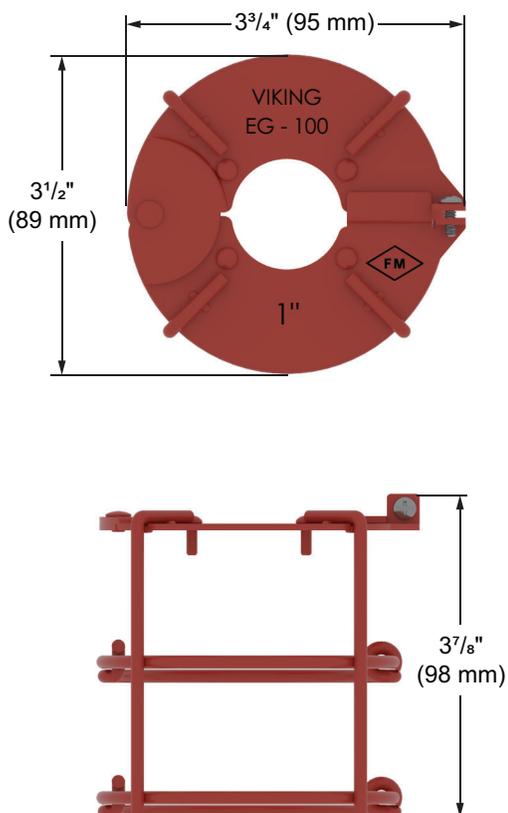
EG Series Guard/Water Shield Markings and Dimensions
